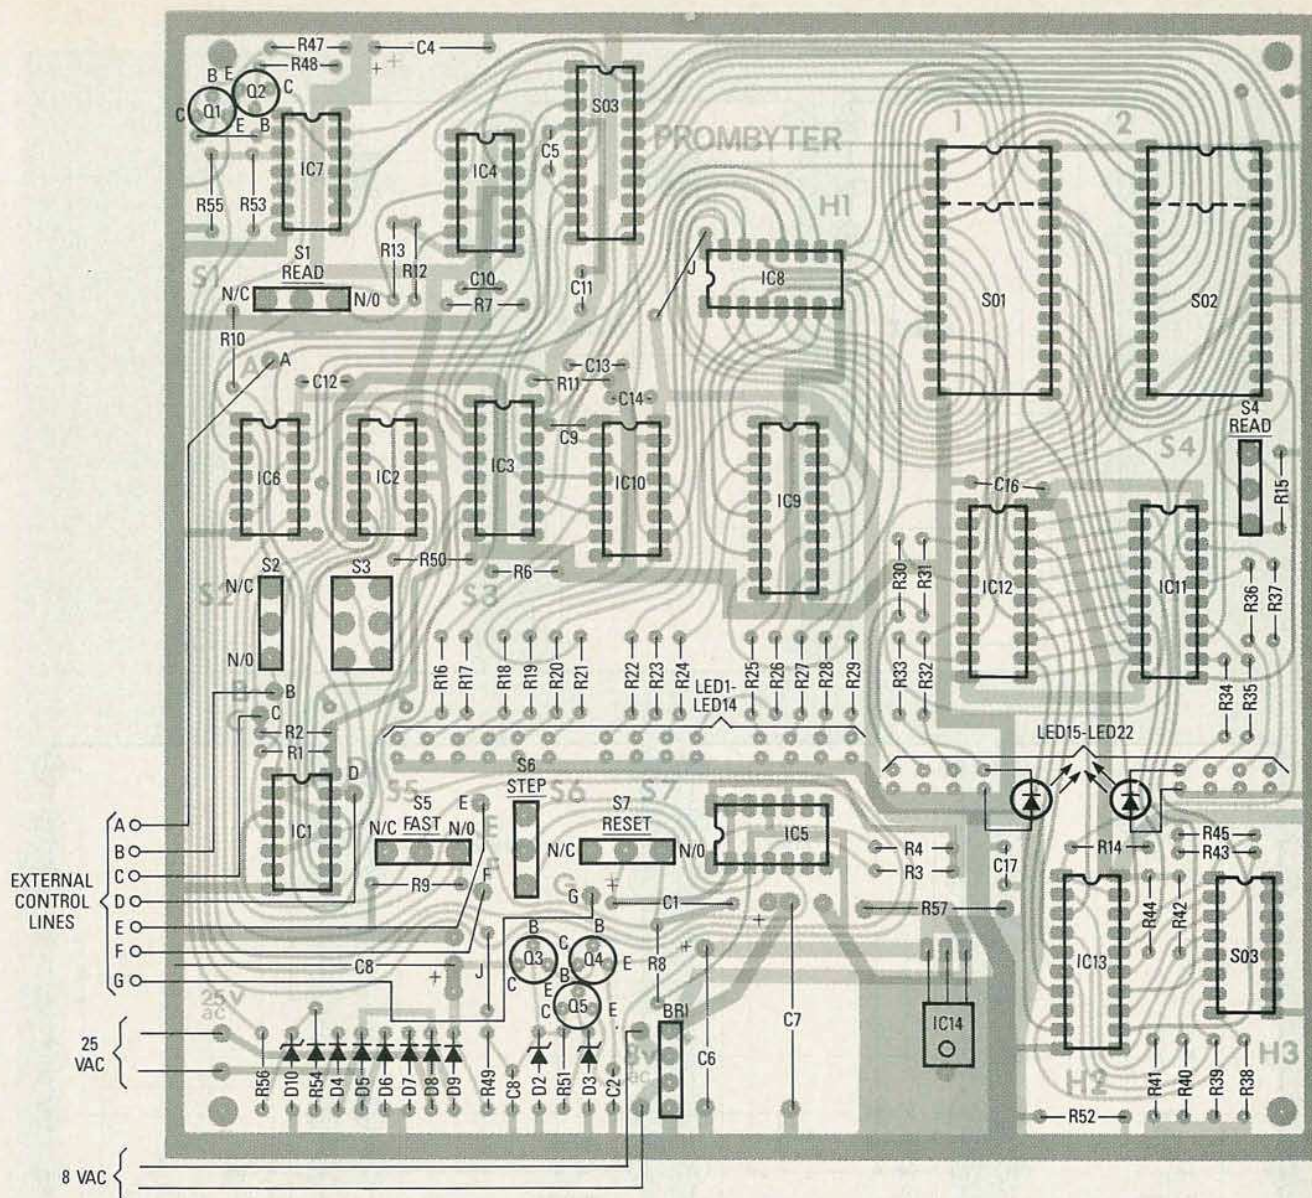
THE EPROM PROGRAMMER'S PC BOARD is double-sided; all components mount as shown here. Since a home-made board's holes are not plated through, the IC sockets must be mounted slightly above the board so that the socket pins can be soldered to the top side of the board.
